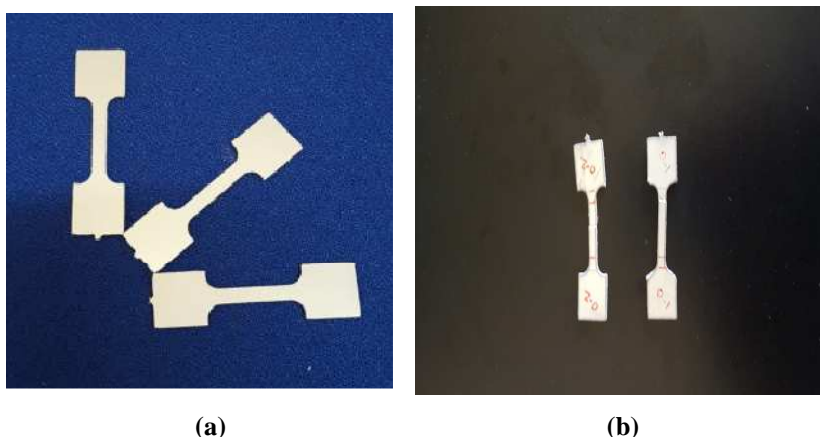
Tensile Test Specimen (a) Before Testing and (b) After Testing
